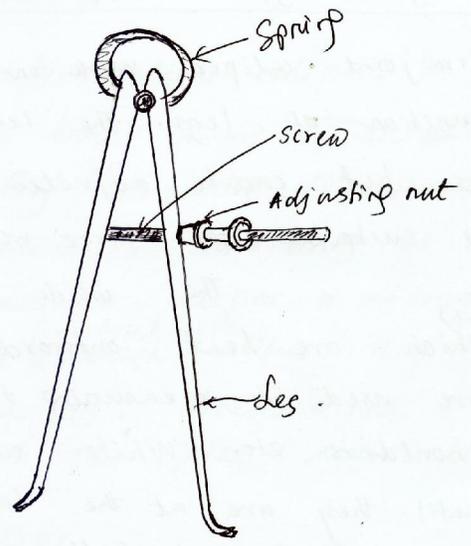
~~inside~~ Spring type ~~caliper~~ inside caliper
